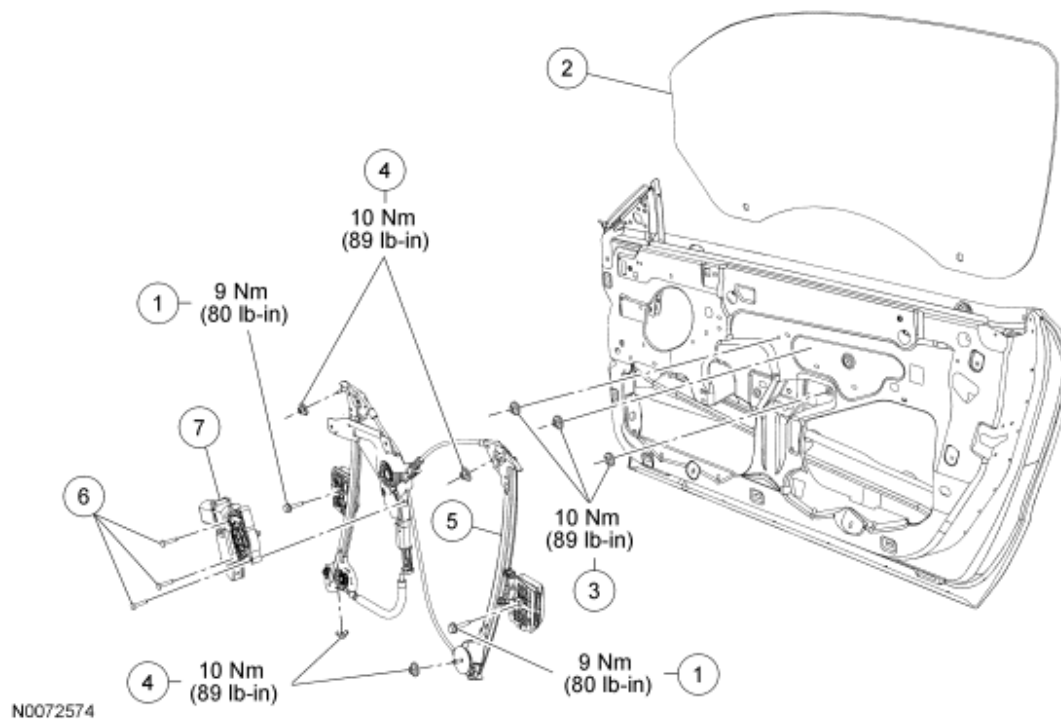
Exploded View Of Front Door Glass, Frames & Mechanisms With Torque Specifications
